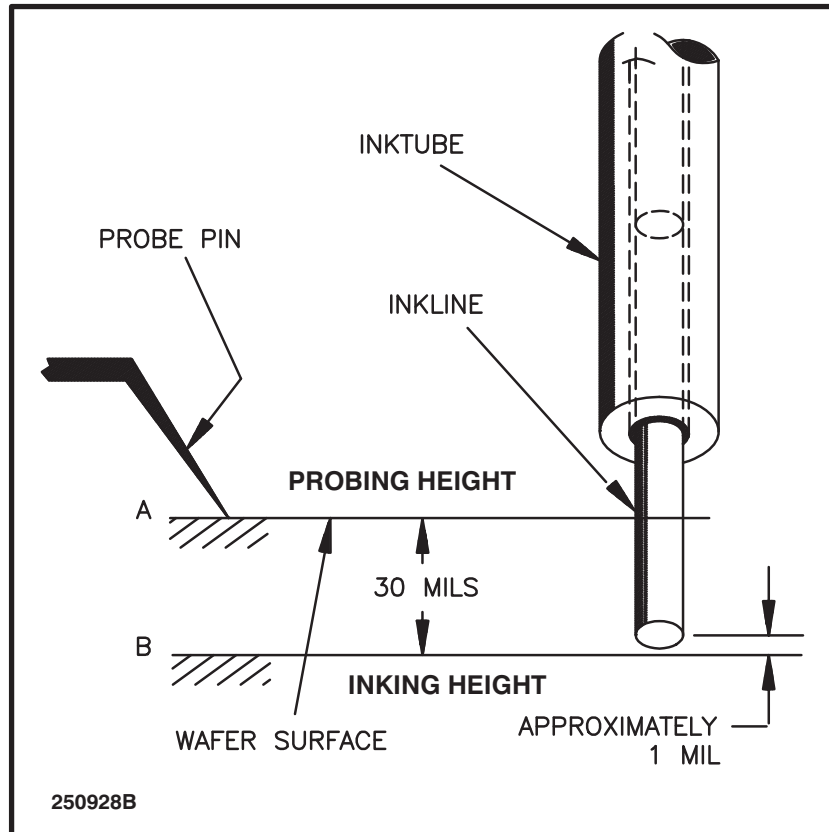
FRONT VIEW OF INK TUBE AND INKLINE
